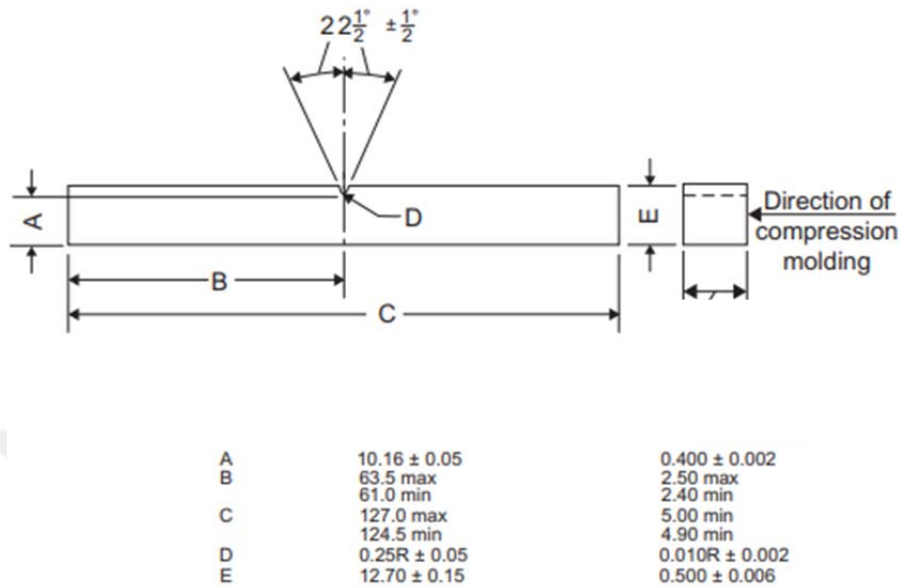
Dimensions of Charpy type test specimen (Ashter, 2014)
